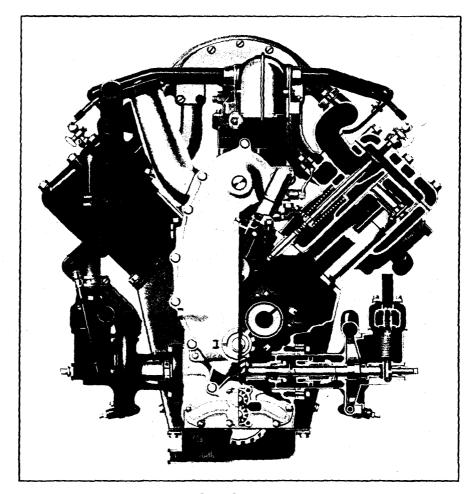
Front View of V-63 Engine with One Half Sectioned
